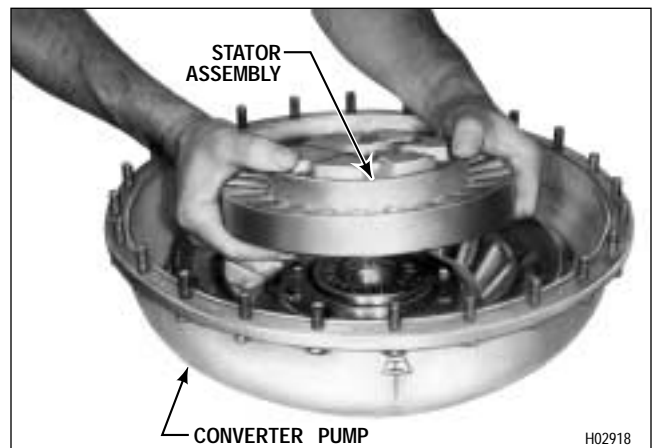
Removing (or Installing) Torque Converter Stator Assembly (AT 543)
